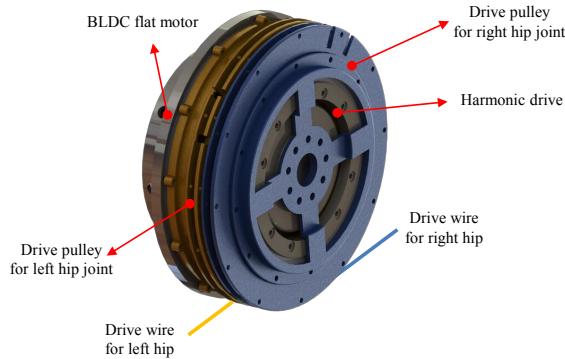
Actuation unit: BLDC motor with harmonic drive
